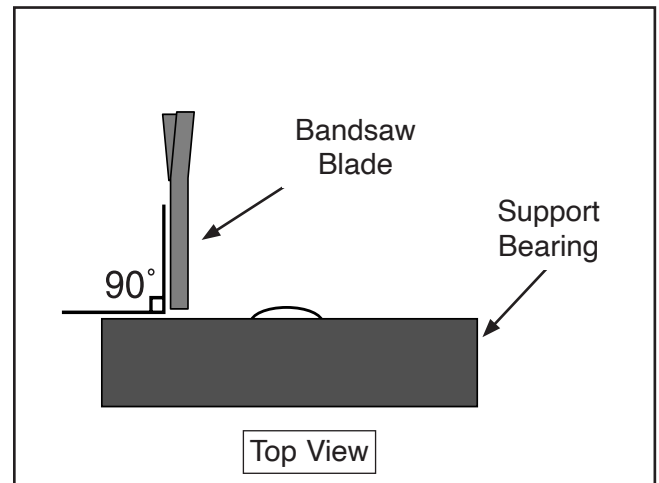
Blade should be perpendicular (90°) to the face of the support bearing.
